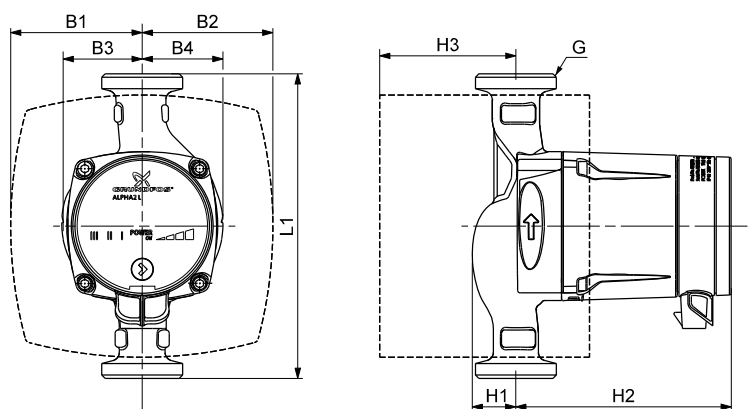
Dimensional sketches, ALPHA2 L XX-40, XX-50, XX-60
